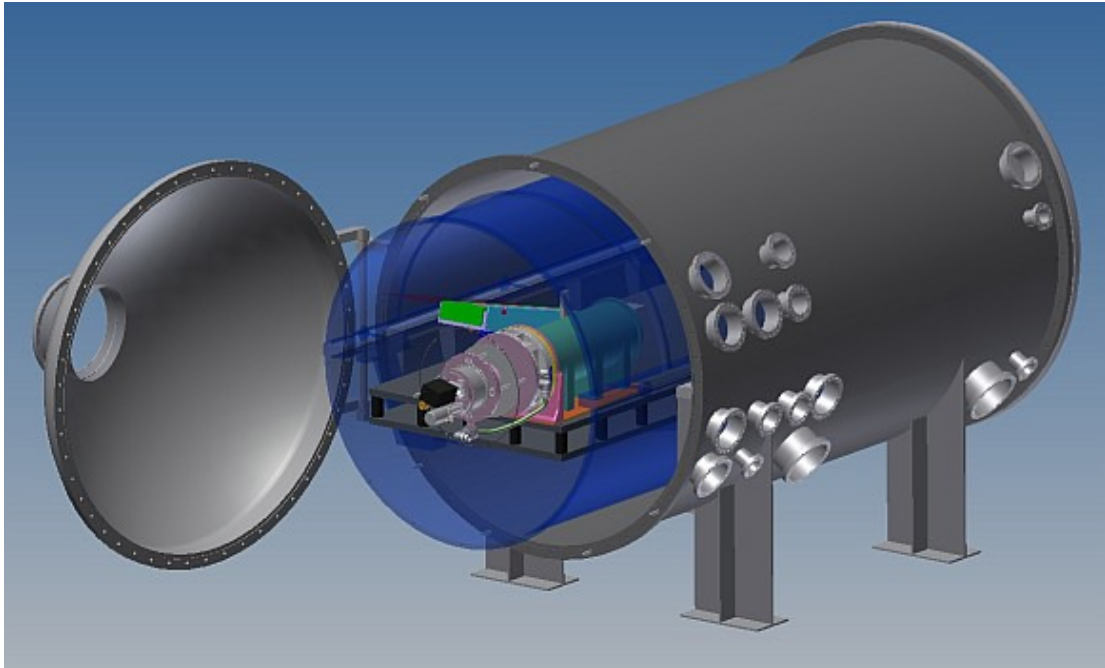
Vacuum vessel with optical bench partially retracted and shield opened.
